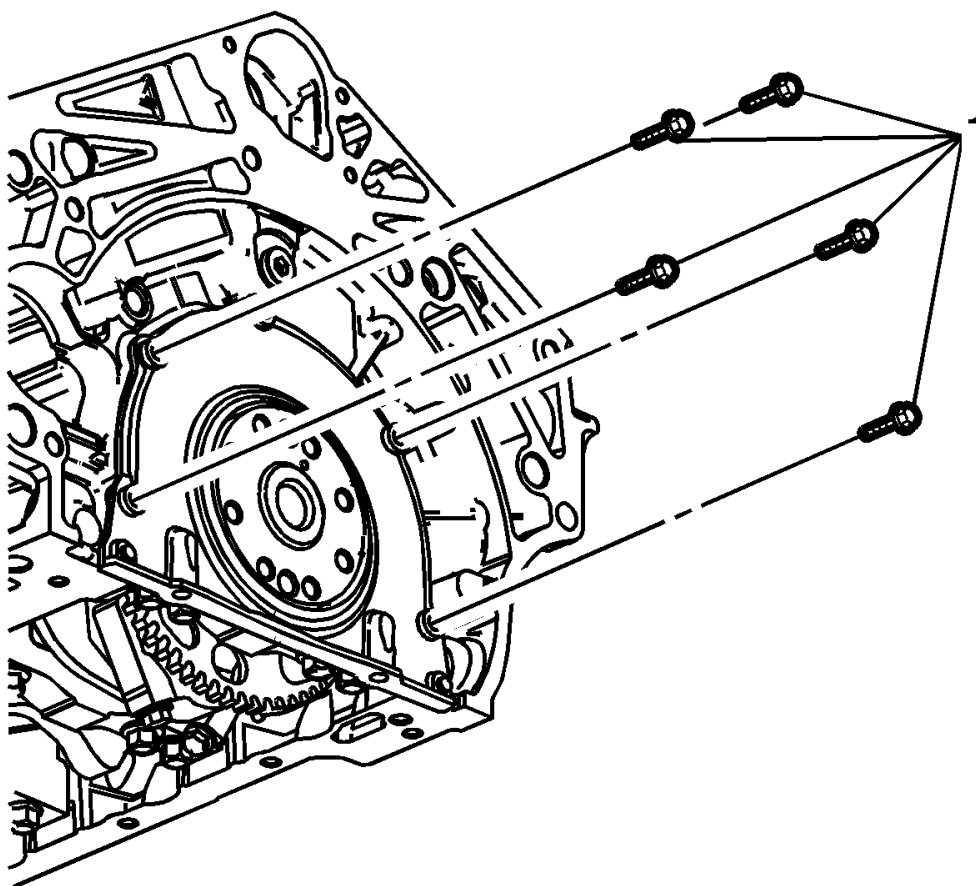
Crankshaft Rear Oil Seal & Housing Bolts
